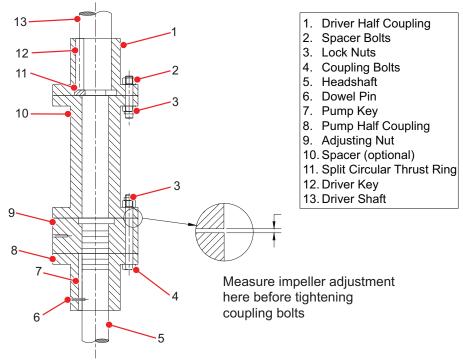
Adjustable Flanged Coupling for Solid Shaft Drivers
